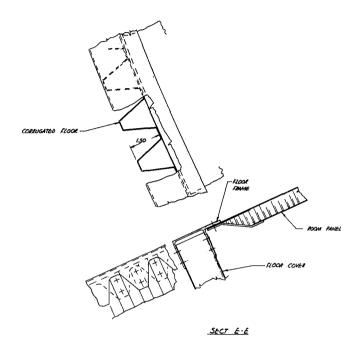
Centrifuge Structural Arrangement - Concept No. 2A
